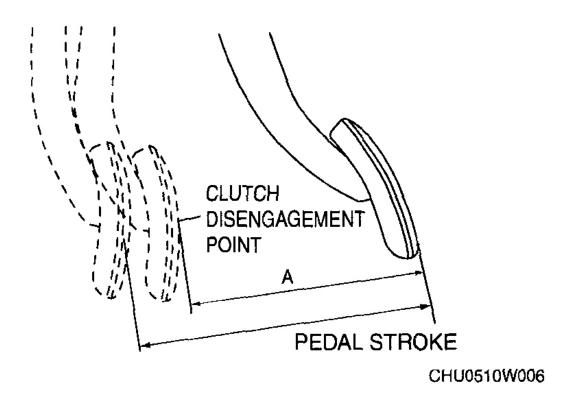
Inspecting Clutch Disengagement Point Courtesy of MAZDA MOTORS CORP.
